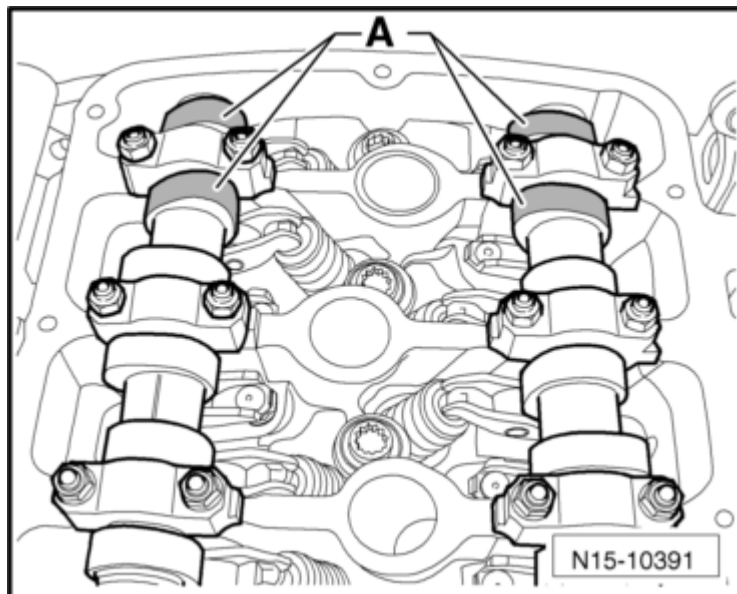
Camshaft Lobes For Cylinder Facing Each Other
